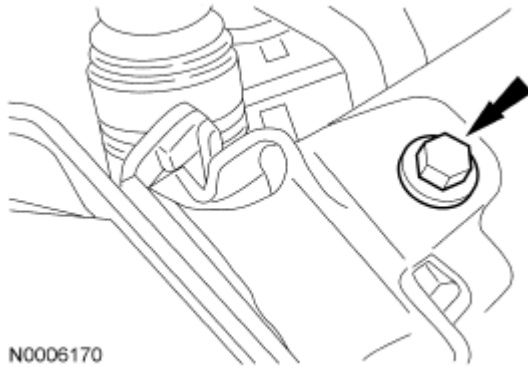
Locating LH Engine Support Insulator Through Bolt
